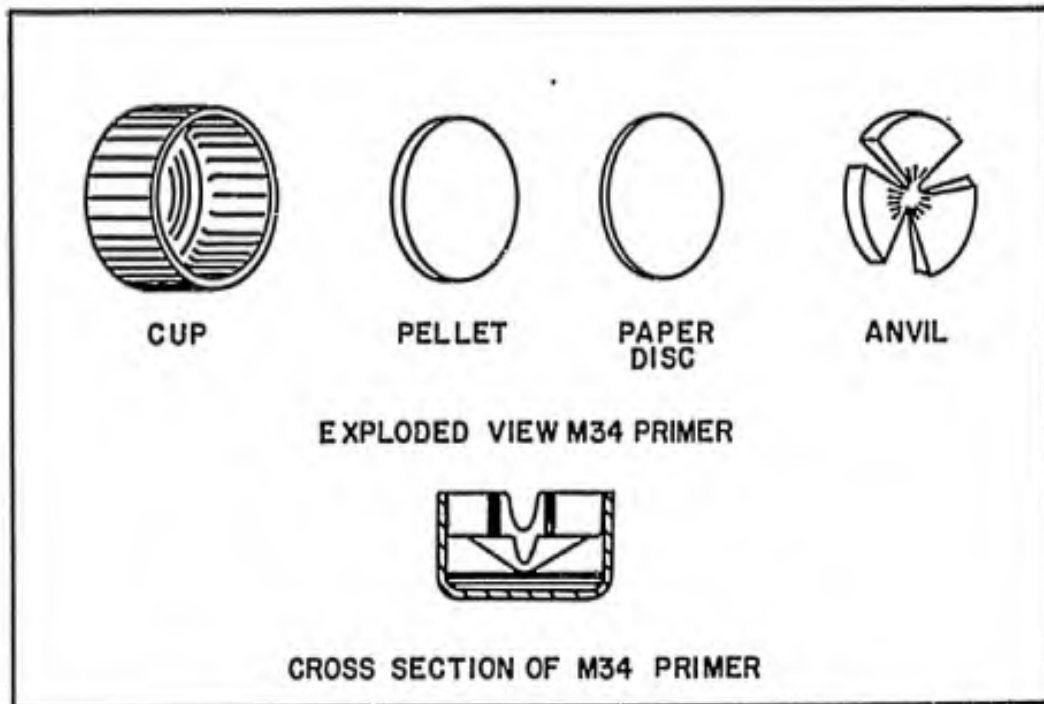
EXPLODED VIEW AND CROSS SECTION OF M34 PRIMER
